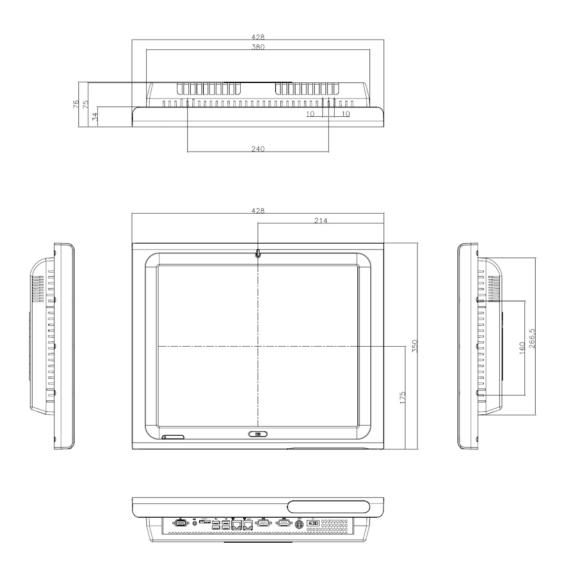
AFL-17B-915 Front Dimensions (units in mm)
